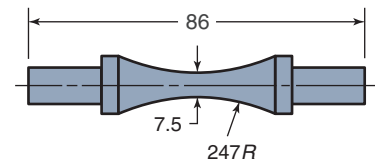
R.R. Moore machine fatigue test specimen. Dimensions in millimeters.
